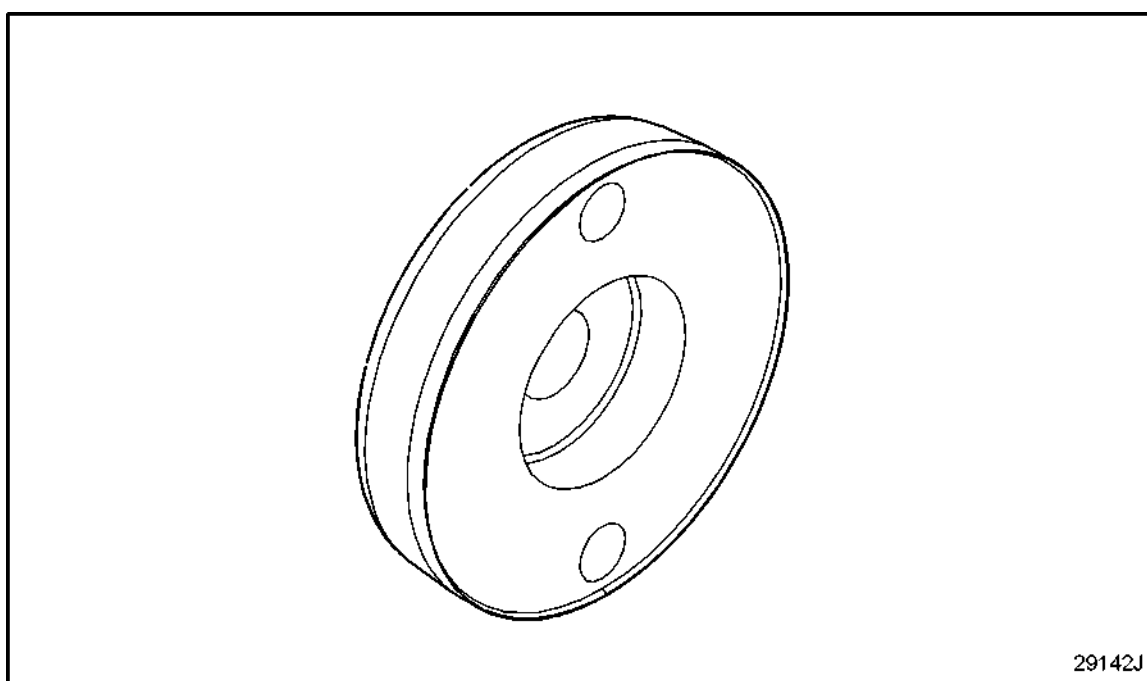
Rear Seal Expander (STD Seal),J 29009-A
